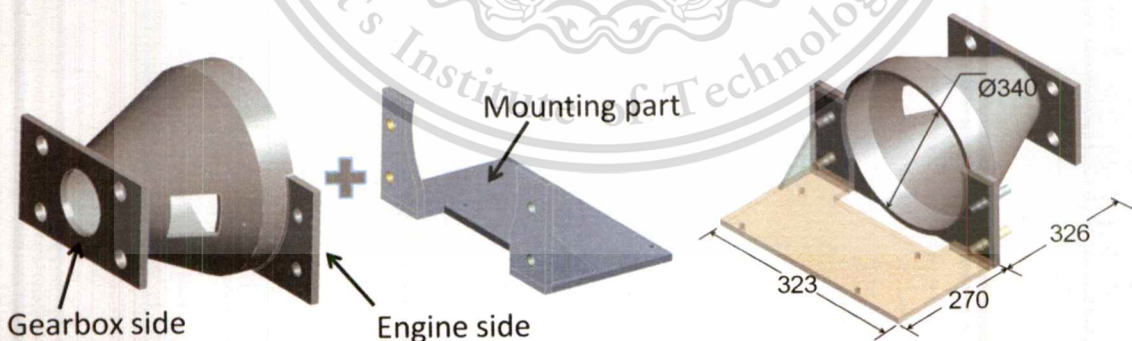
A clutch housing prototype model (all dimensions are in mm.)
